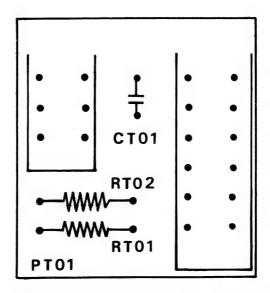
Mono Push Switch Assembly PT01 Component Locations
